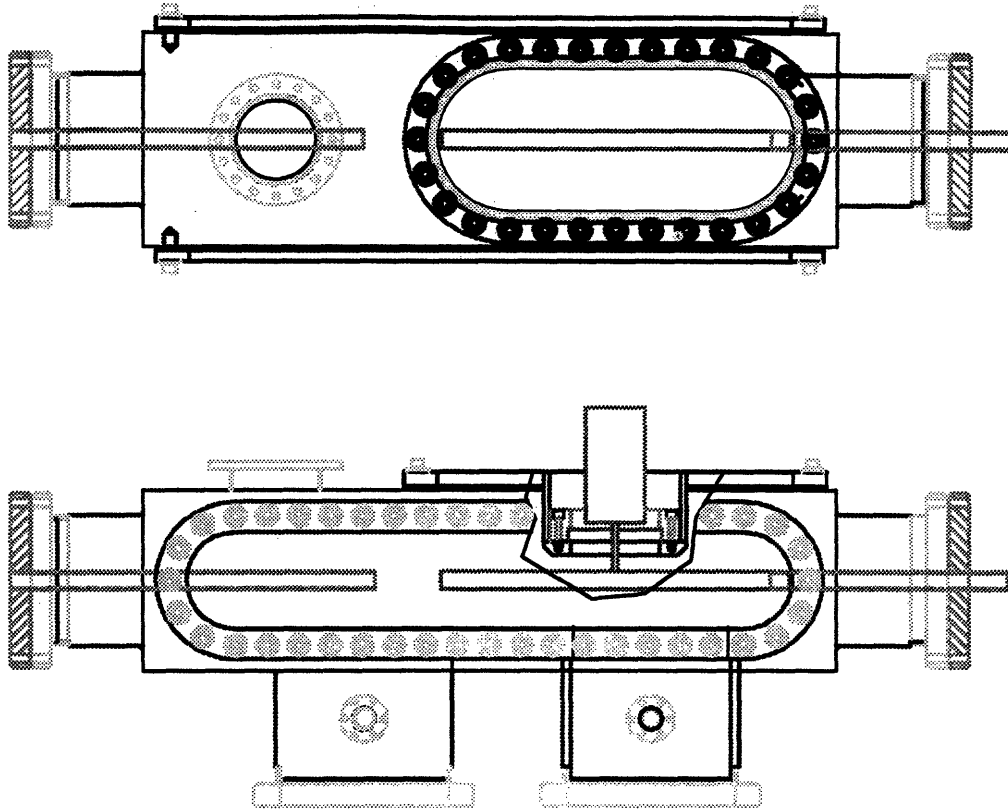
The design drawing of the aluminum chamber and the top flange for mounting the optical glass cell.
